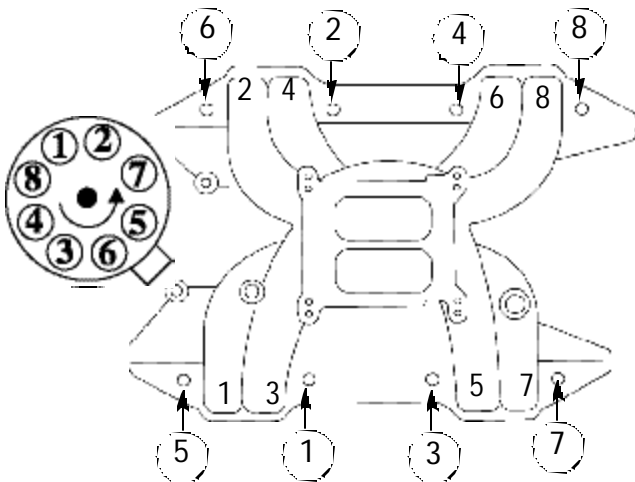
361-440 c.i.d. Chrysler Intake Manifold Torque Sequence
